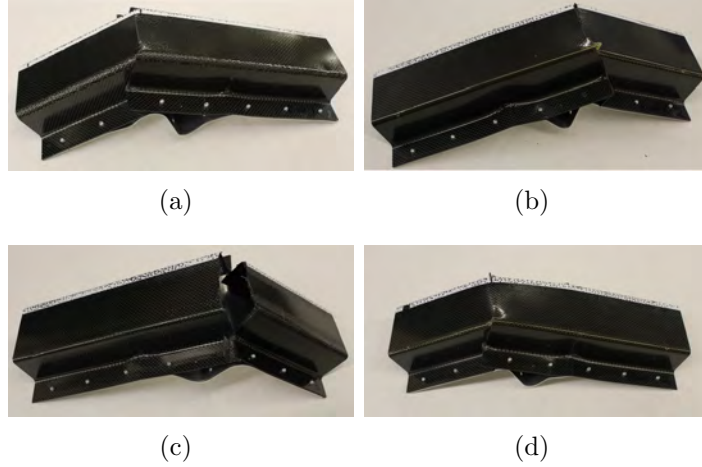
Riveted top-hat structures after four-point-bend tests: samples (a) Rivet-b-1; (b) Rivet-b-2; (c) Rivet-b-3; (d) Rivet-b-4.
